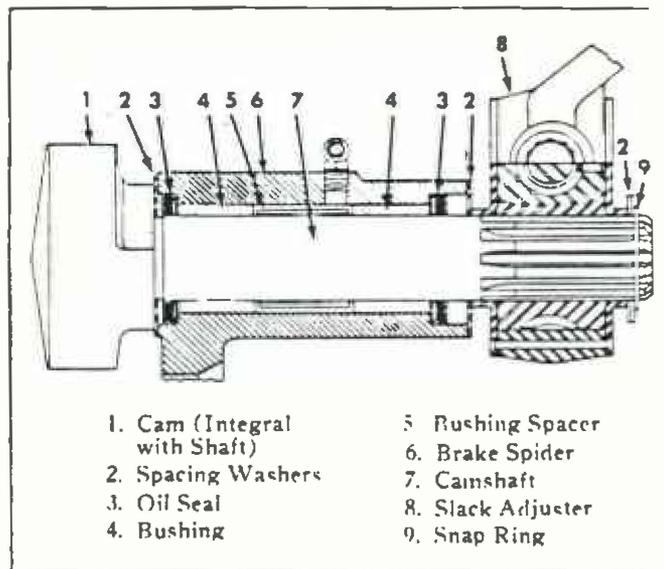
Typical Brake Camshaft and Slack Adjuster Mounting
